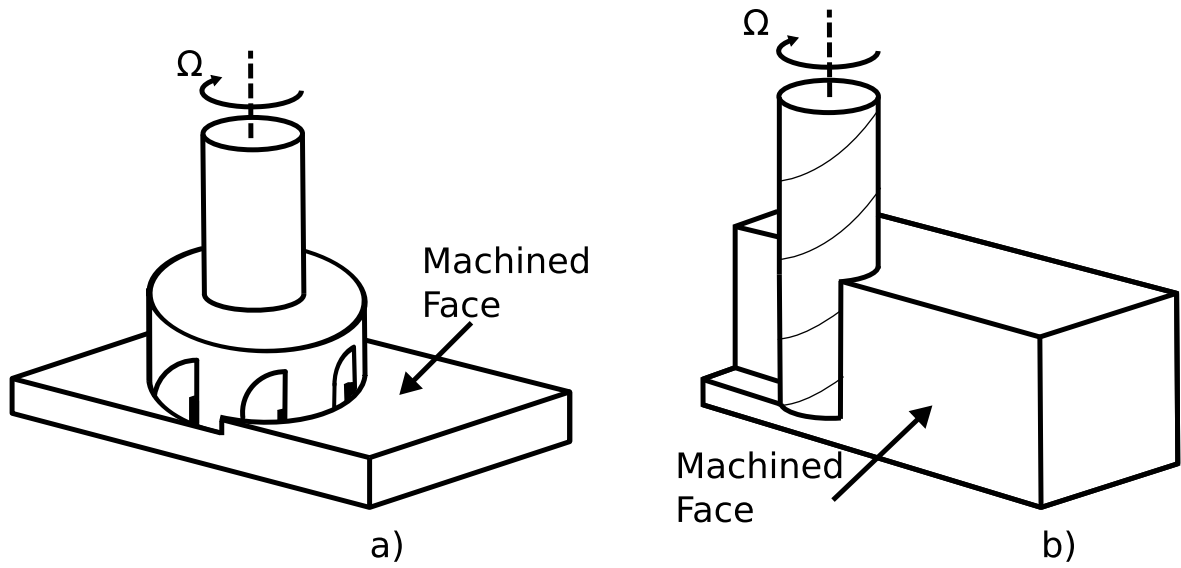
a) Face milling process, b) Peripheral milling process
